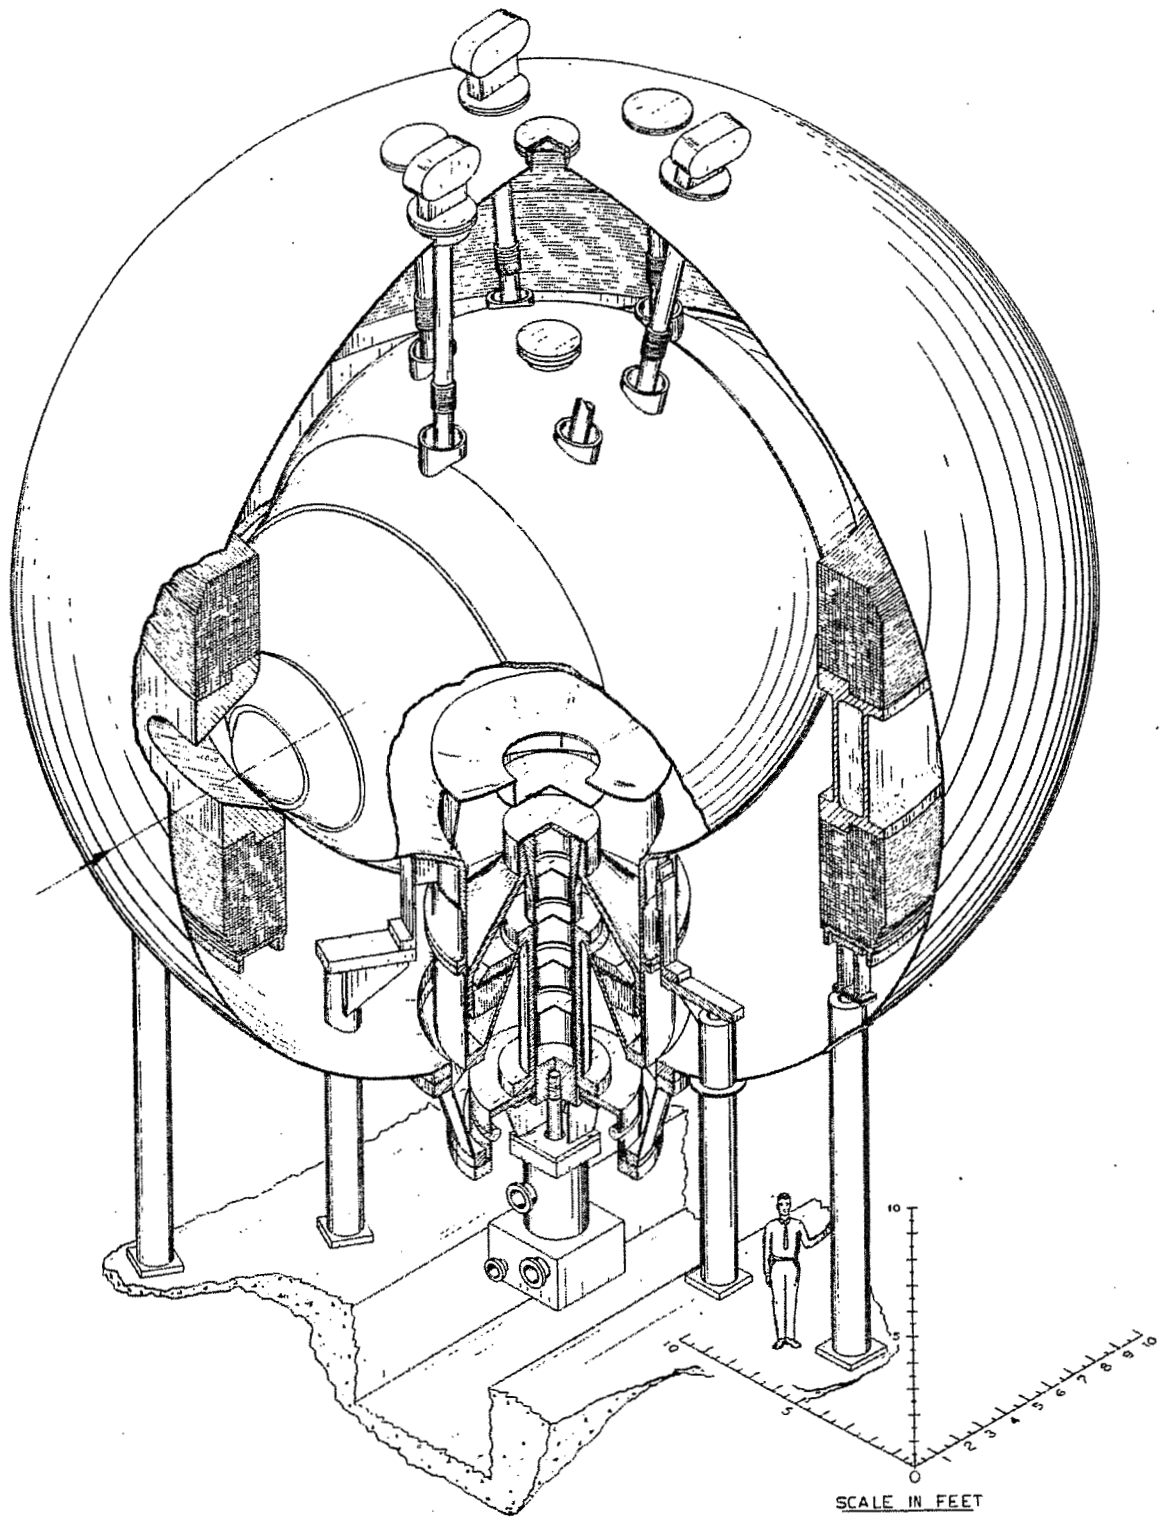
25-ft bubble chamber main assembly - isometric view.
